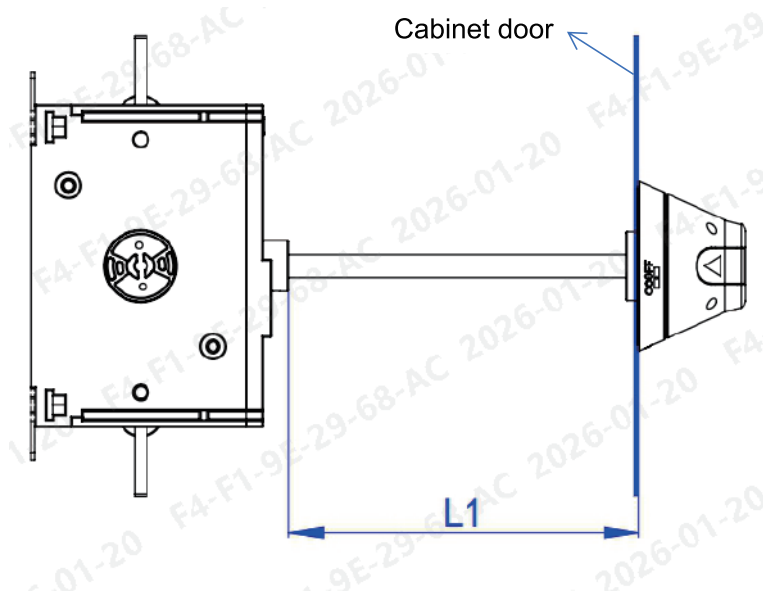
Outline Dimensions of Front Handle Inside the Cabinet Note: All dimensions without specified tolerances
